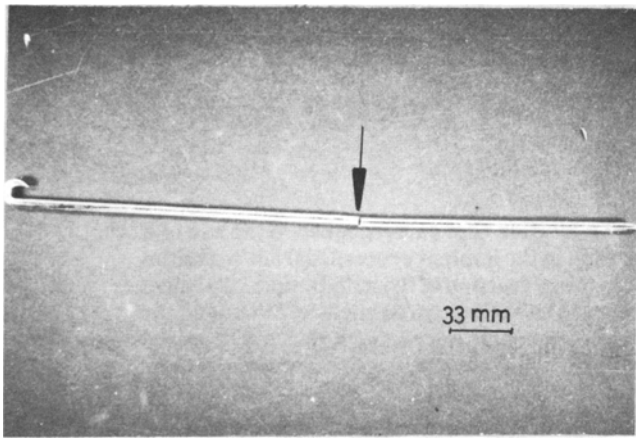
Photograph of fractured rush nail. The unbalanced arrow indicates the fractured site of the implant.
